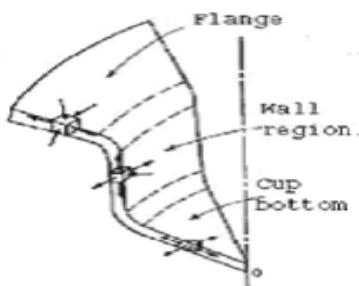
Sectional positions of warm cylindrical cup deep drawing.
